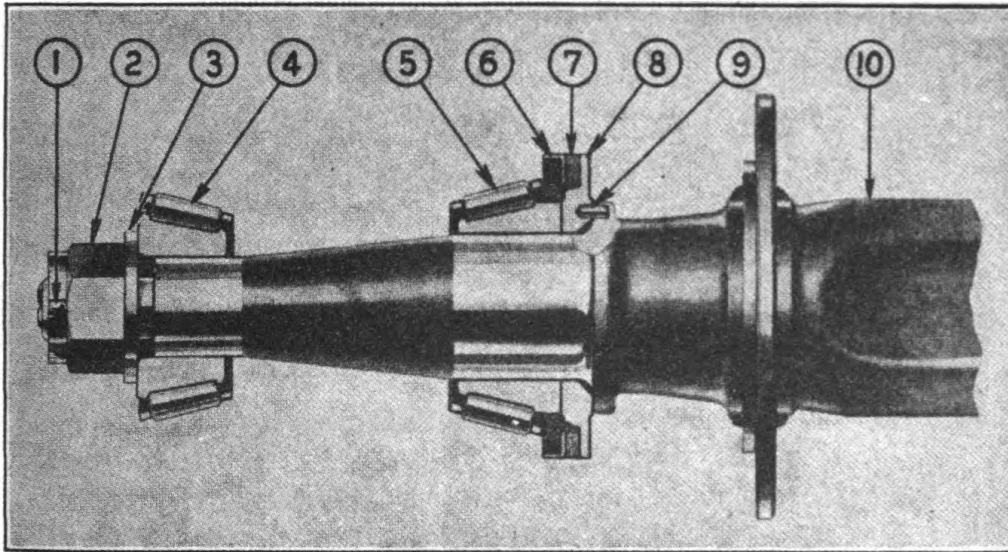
CONVERTER GEAR AXLE AND WHEEL PARTS
